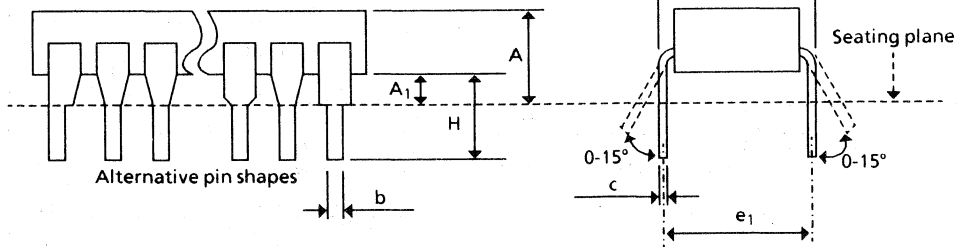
24-Lead Ceramic DIL (solder seal) - package style C
